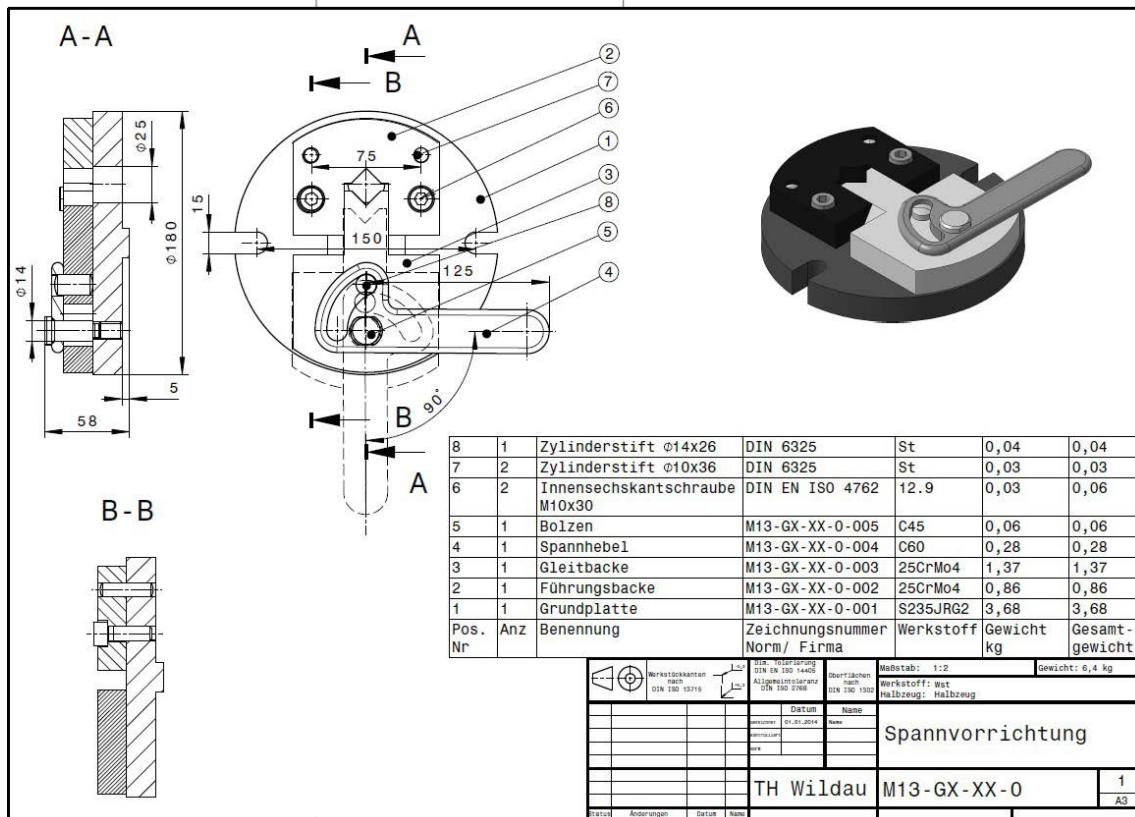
Assembly drawing of the product "Spannvorrichtung"
